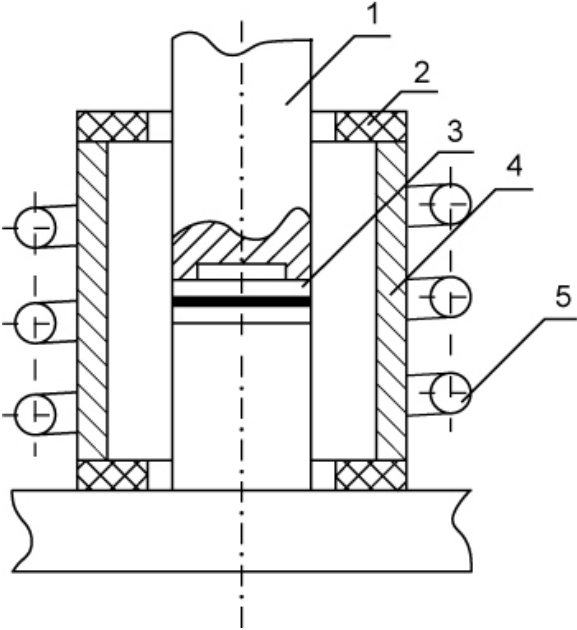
The system of indirect radiation heating: 1 - Fixing tool; 2 - Insulator; 3 - Welding compound; 4 - tube element, 5 Inducer
